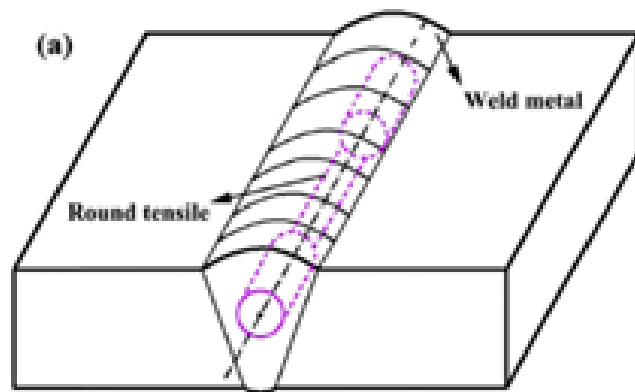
Test specimen location for deposited weld metal tensile
